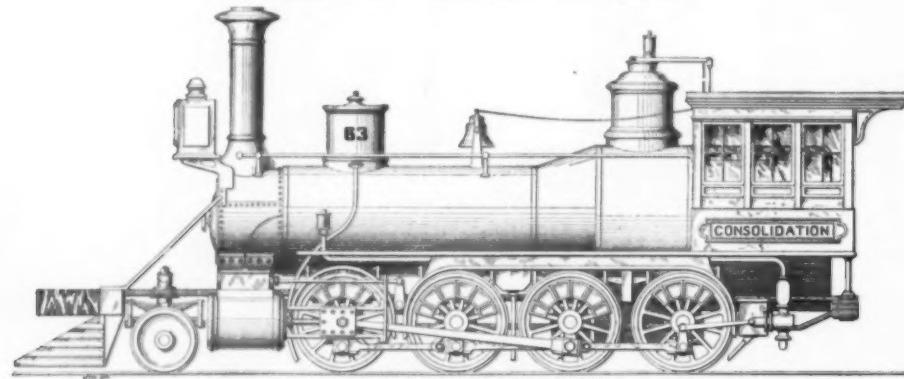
FIRST CONSOLIDATION ENGINE, BUILT AT THE BALDWIN WORKS, 1866—LEHIGH VALLEY RAILROAD.
